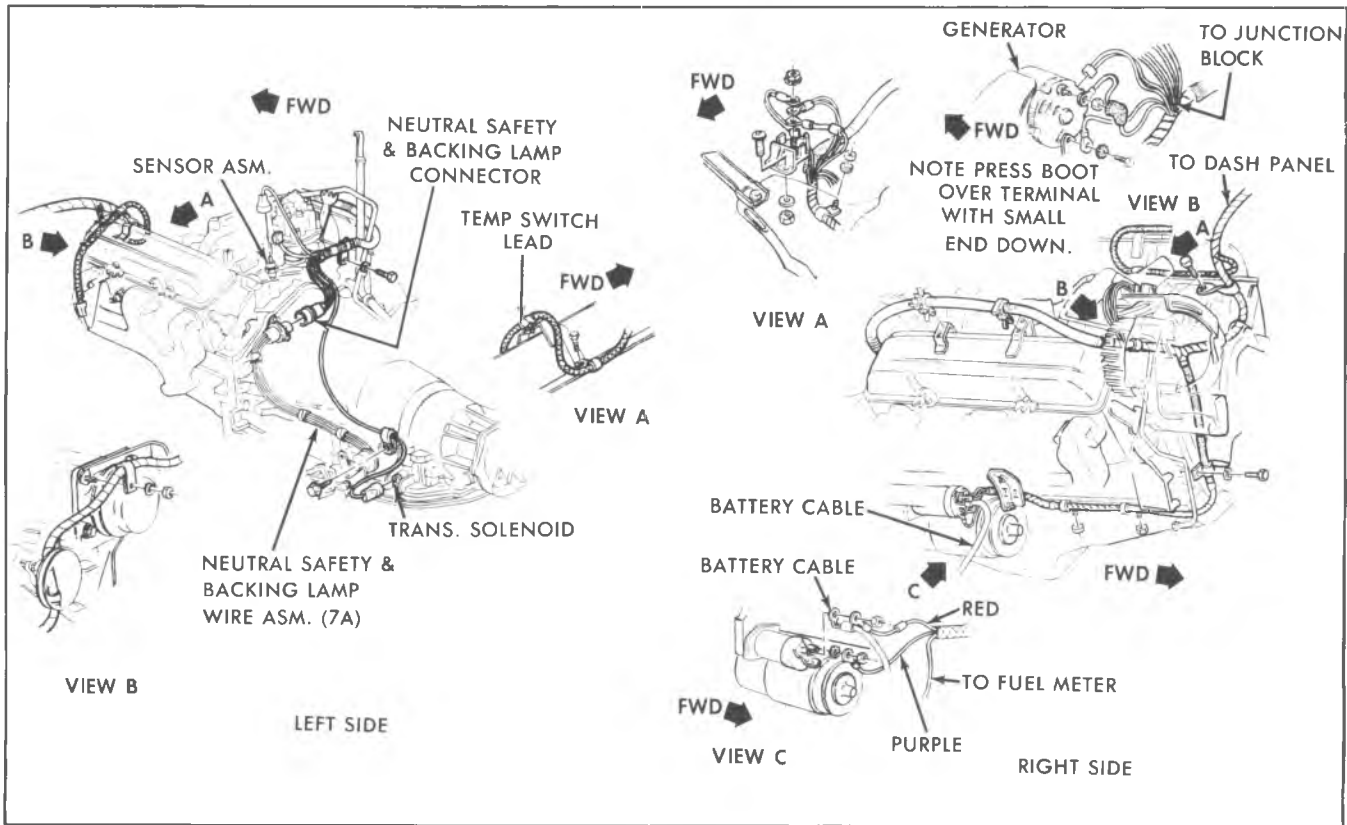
P-30 (32) Truck V-8 (LS9) Engine Wiring
